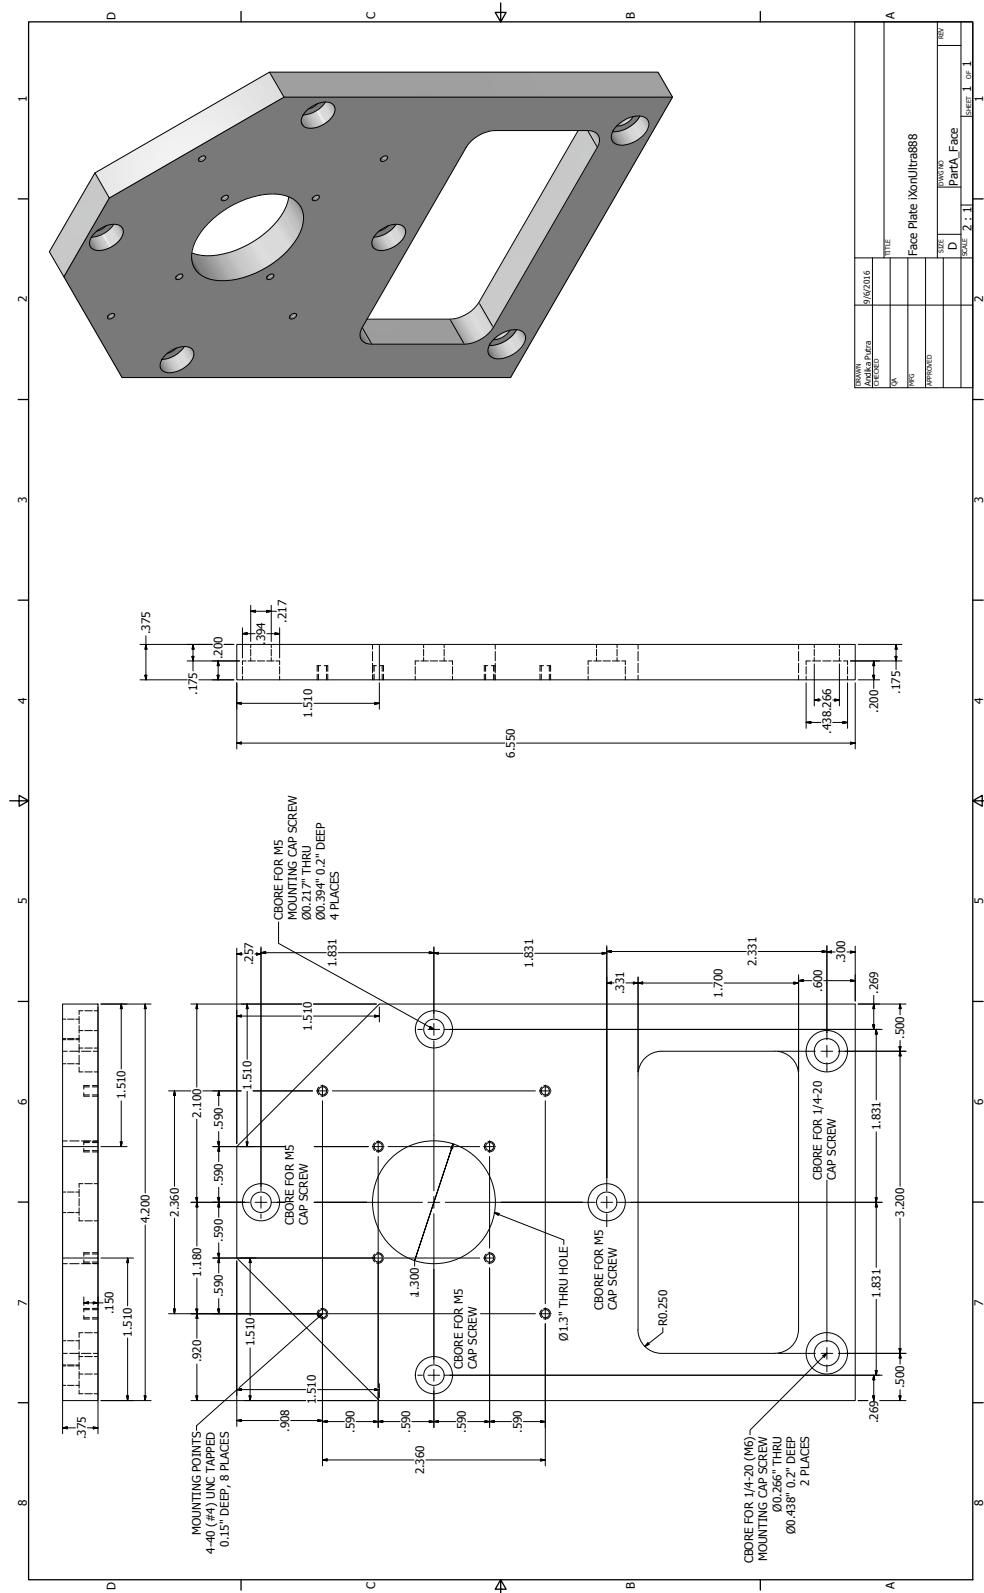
Machine drawing (not to scale) of the front mounting plate for iXon Ultra 888.
